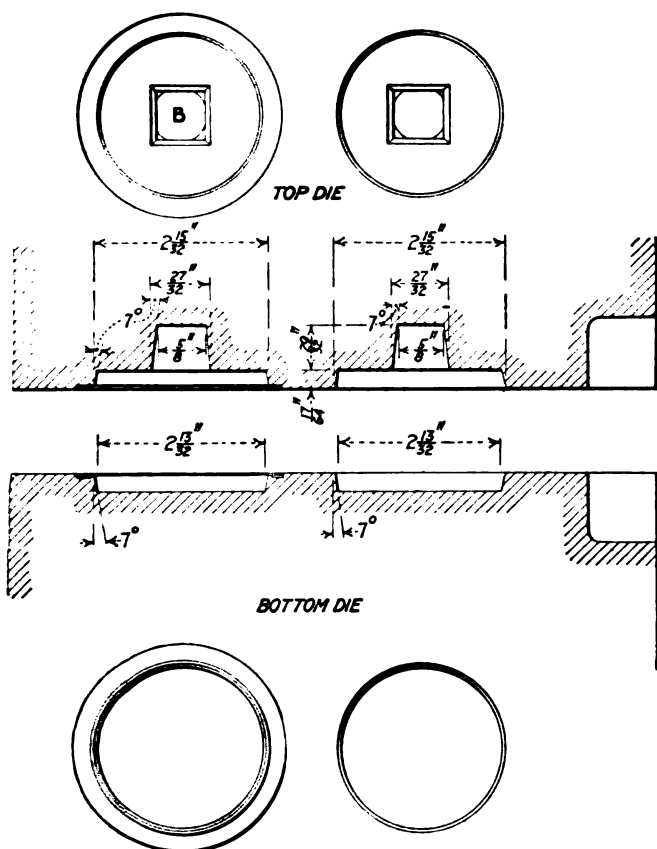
DIES AND FORGING FOR RIVETED BASE PLATE FOR 18-LB. HIGH-EXPLOSIVE SHELL
